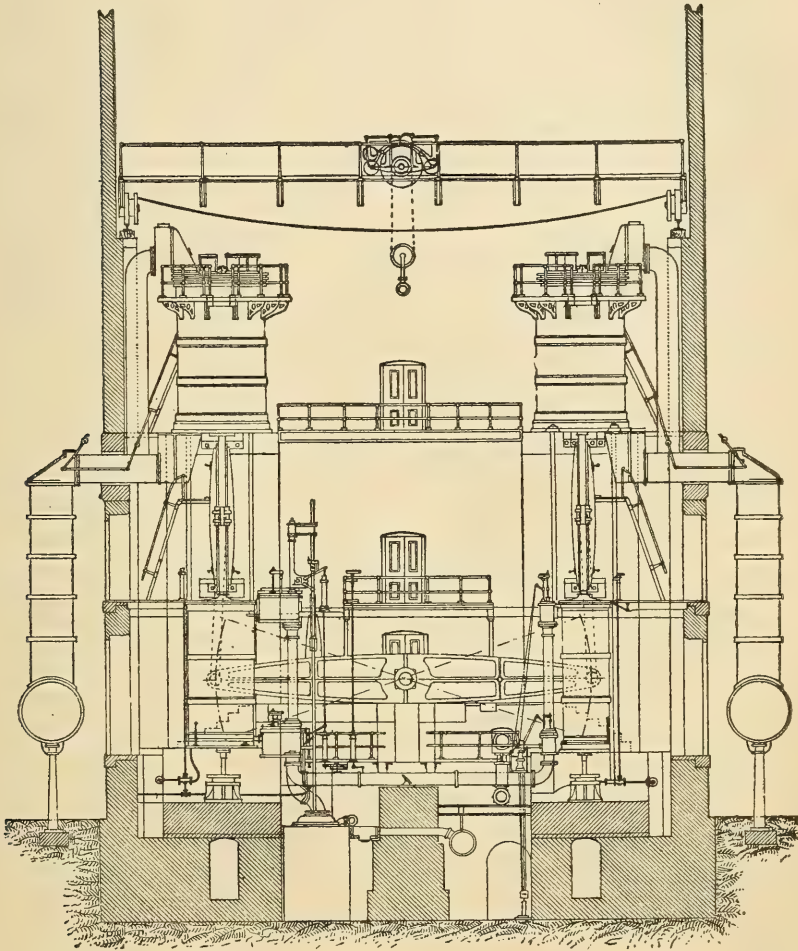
Side-lever Combined Blowing Engines, by Wilson of Patricroft.
